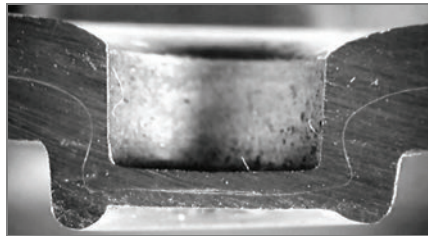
The sheet joint cross-section (X – overpress bottom thickness)
